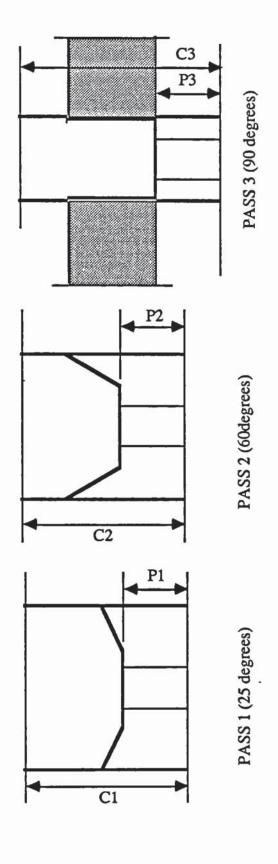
DEFINITION OF ROLL DIMENSIONS
